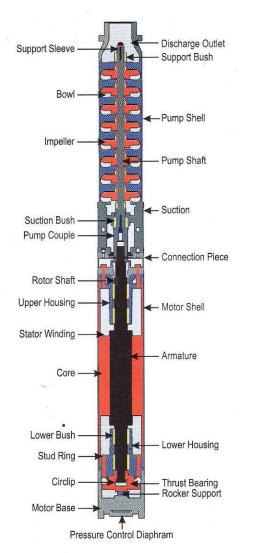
Sectional View of a 100 mm (4") Submersible motor
